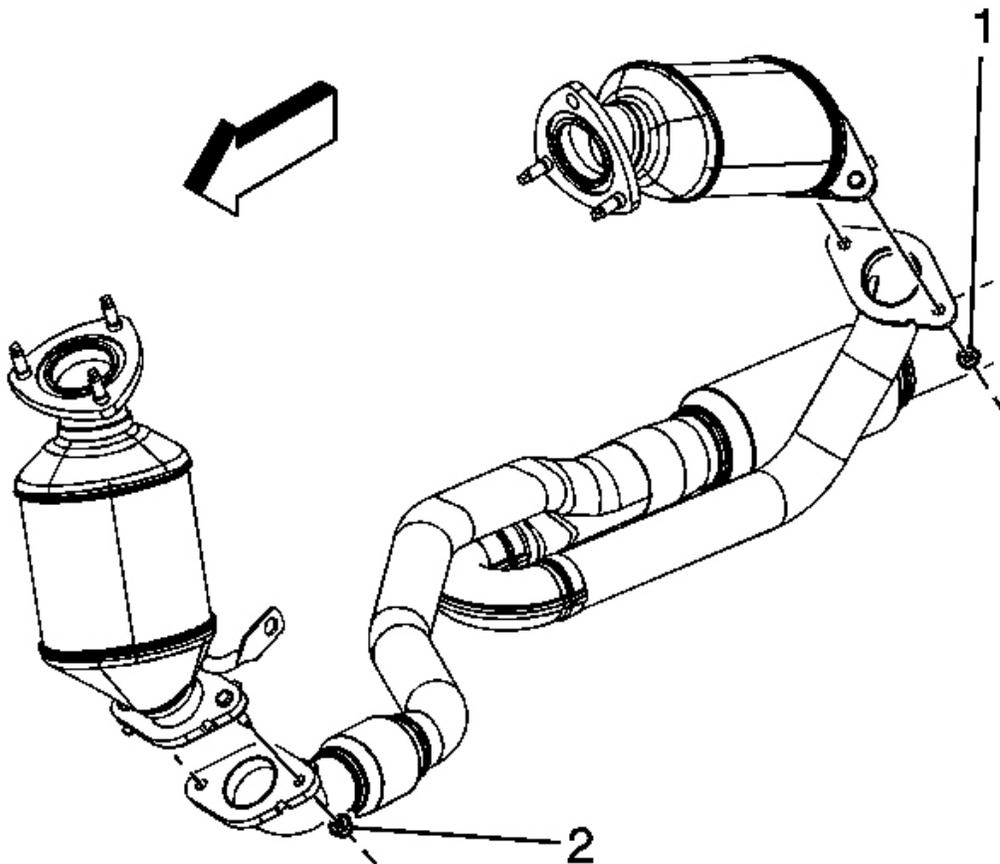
Identifying Catalytic Converter To Exhaust Flexible Pipe Nuts
